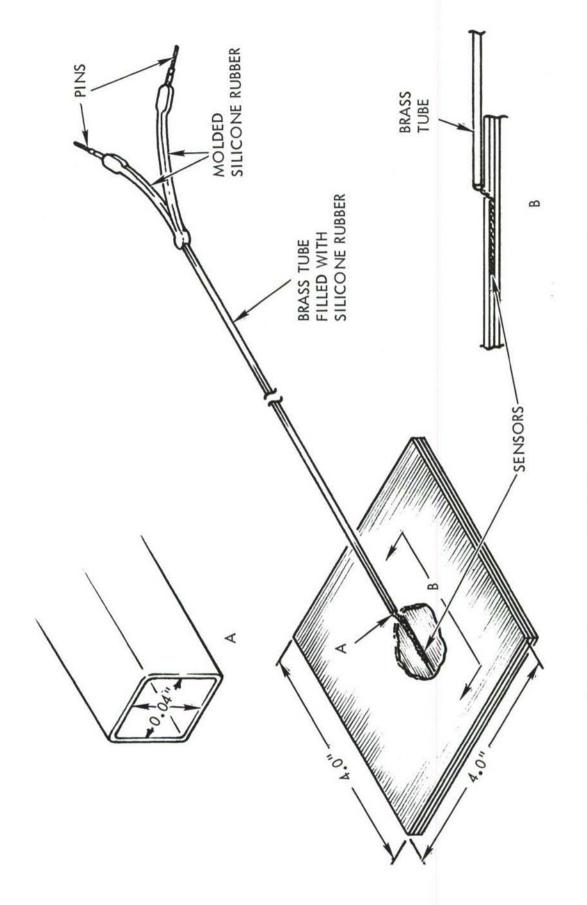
Final Design for Environmental Exposure Specimen and Sensor
